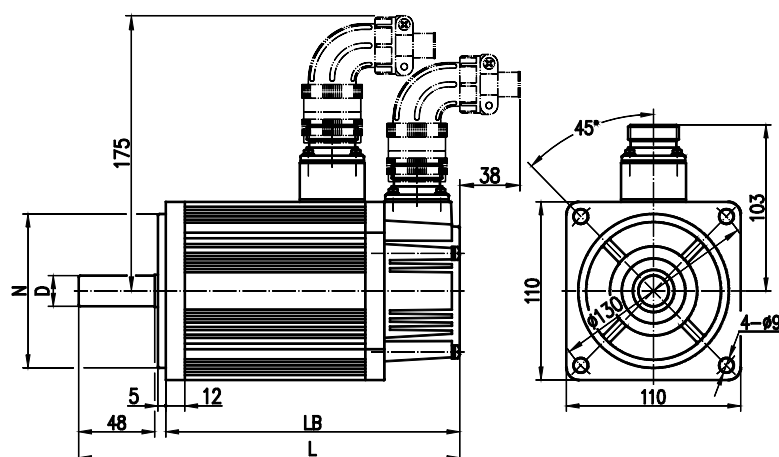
External view and installation dimensions of SJT series of AC servomotors with 110# base
